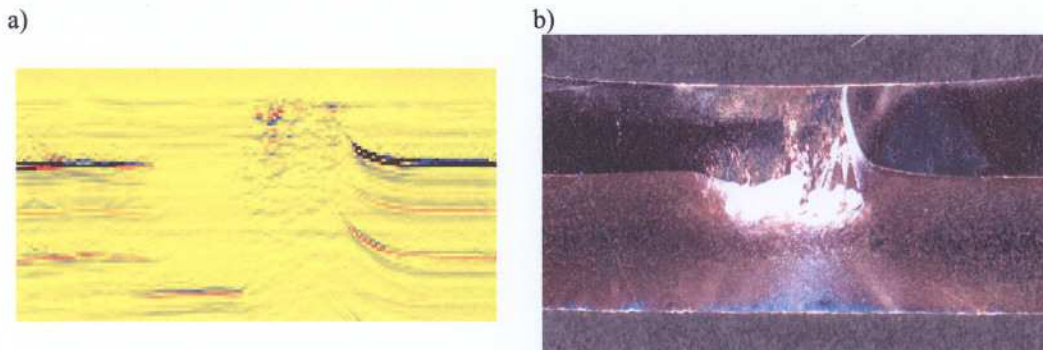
Cross-section of a second lap joint with many defects. Welding parameters: no-threaded cylindrical pin, welding speed of 500 mm/min, spindle speed of 1000 RPM, shoulder penetration of 0.1 mm. a) SAFT image obtained by immersion on the weld side and b) corresponding metallography
